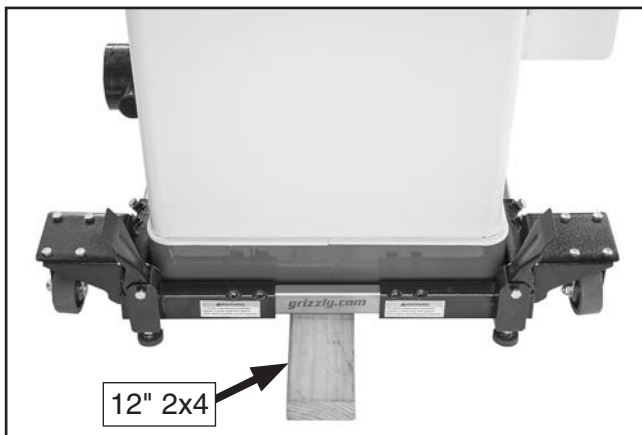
Rear brackets and rail placed around back of machine, which is raised up with a wood block.
